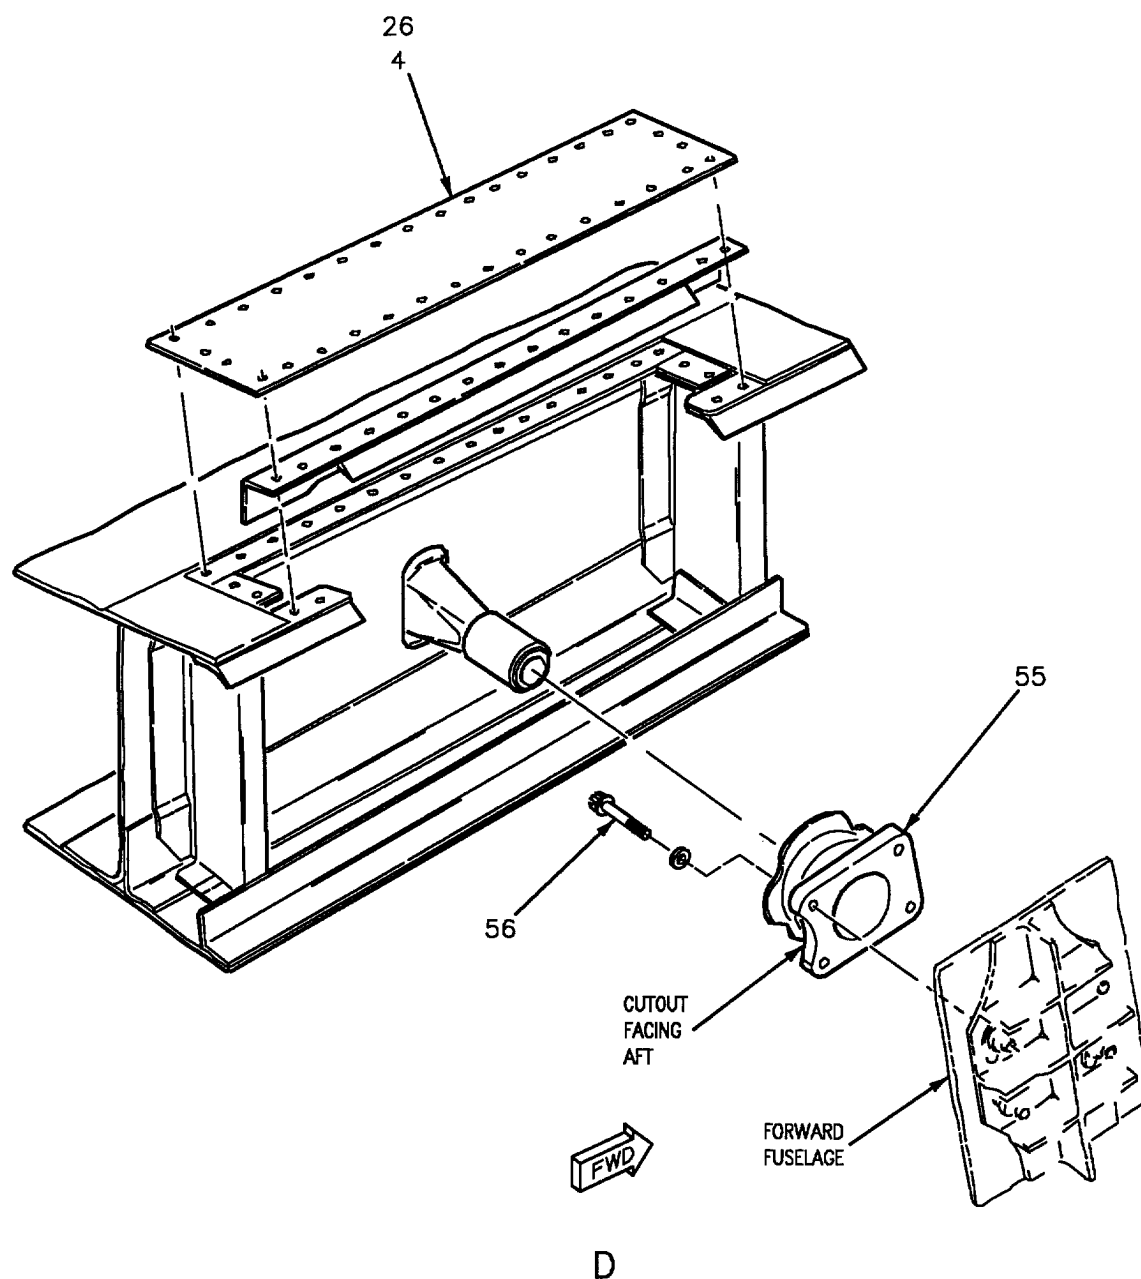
Leading Edge Extension Removal and Installation (Sheet 4)
